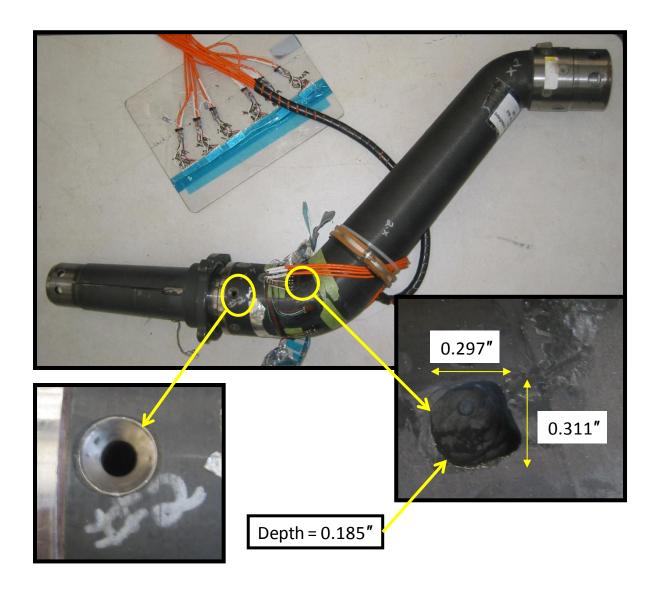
CUWP Test Article with Bore and #2 Fastener Removed
